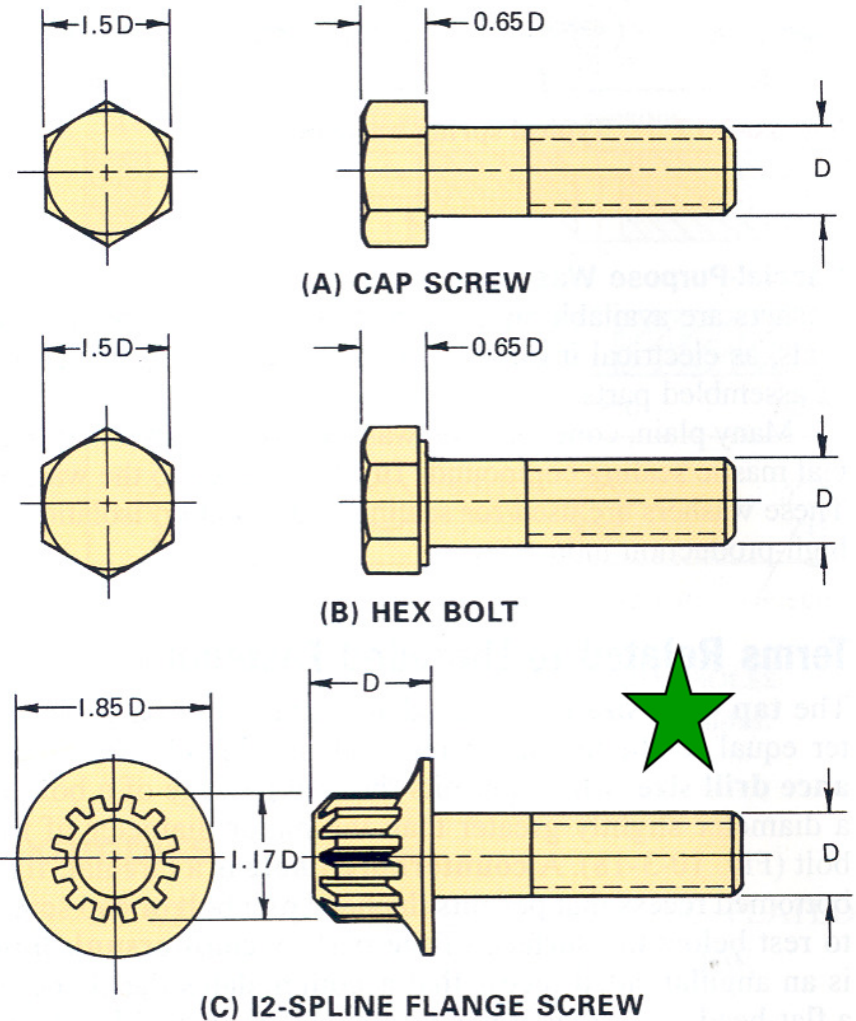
Approximate head proportions for hex-head cap screws, bolts, and nuts.
